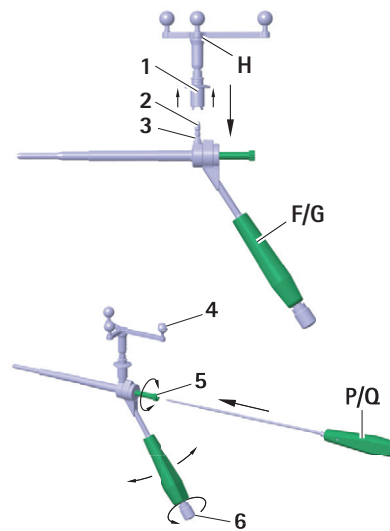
Mounting the Aesculap star unit on S<sup>4</sup>C drill guide FW664R/FW665R
